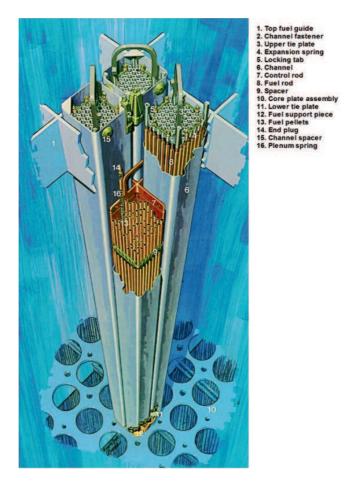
A BWR fuel assembly (Adapted from [37]).
